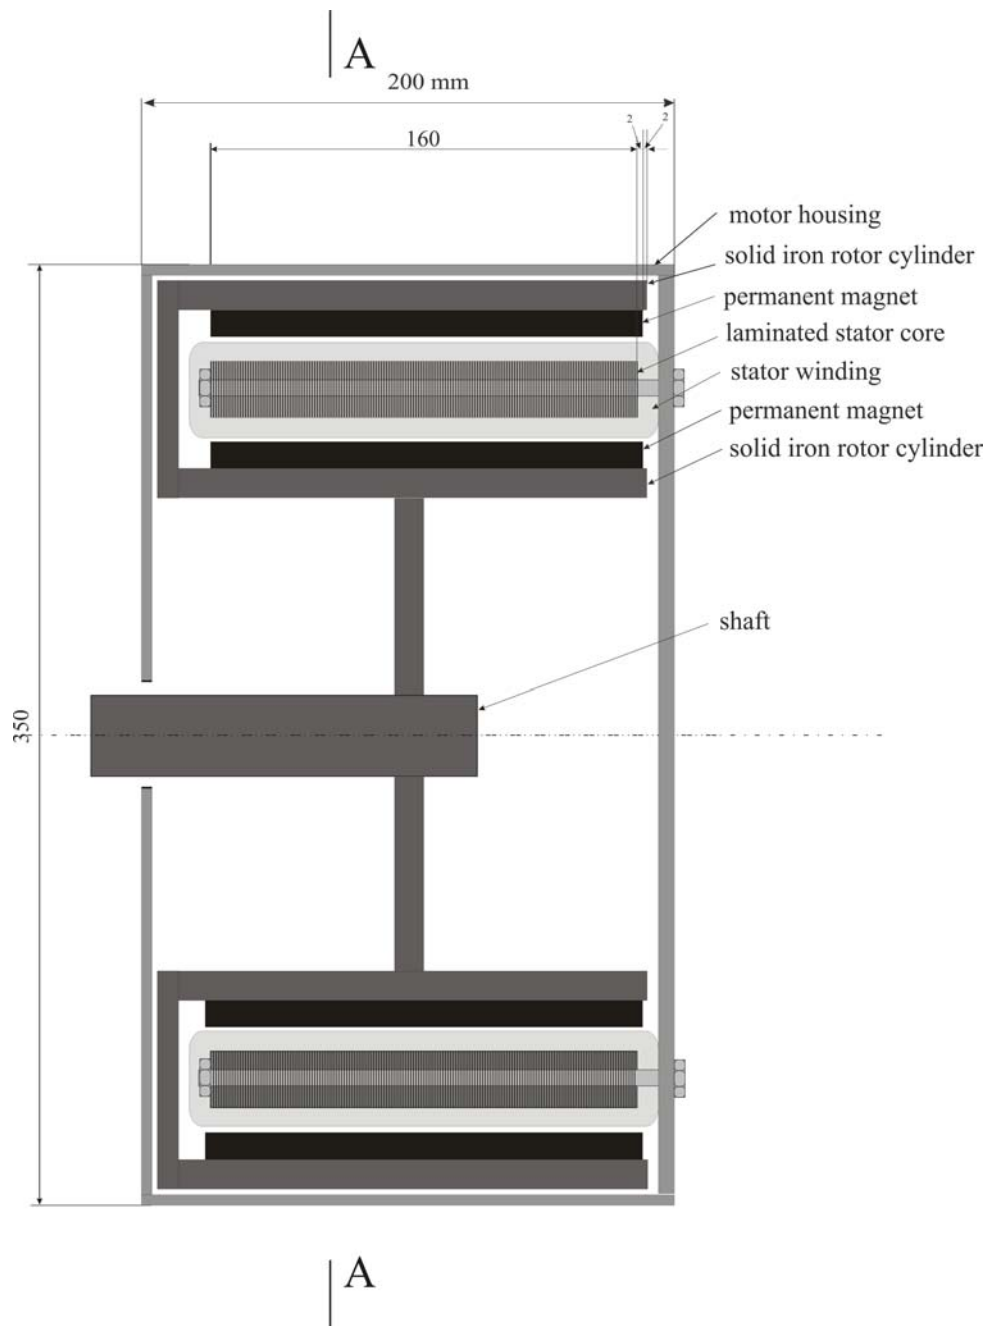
(a): Scheme of the cylindrical shape double-rotor PMM with the dimensions marked
